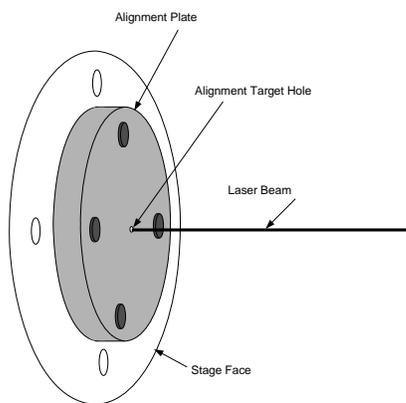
Axis Alignment Using Alignment Plate with Target Hole
